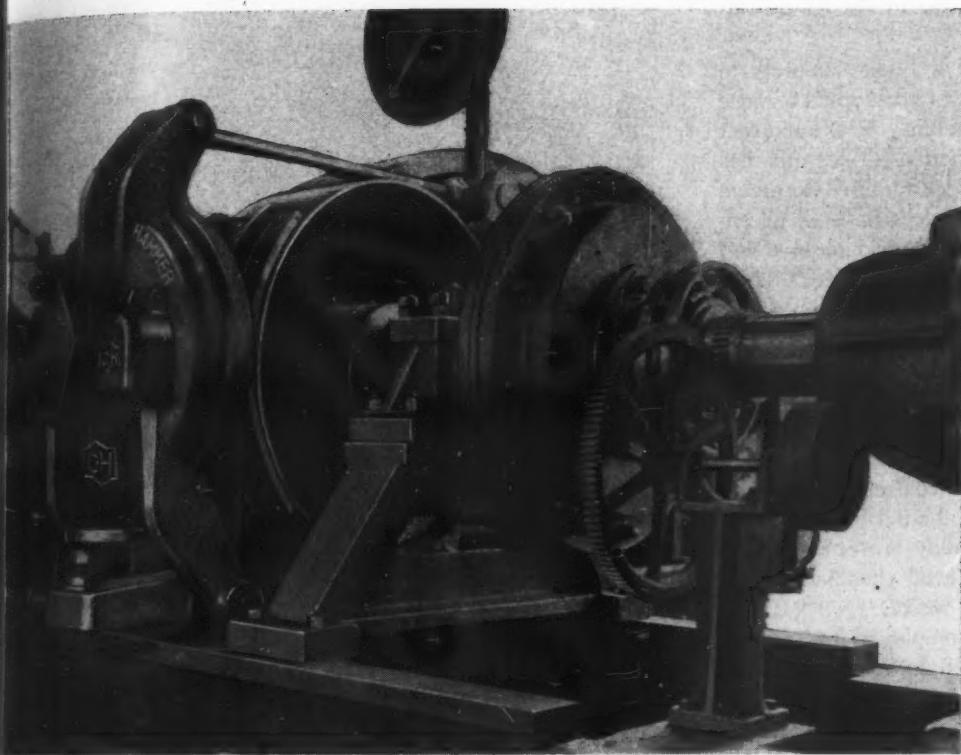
Application of a magnetic brake to a coal-yard hoist
